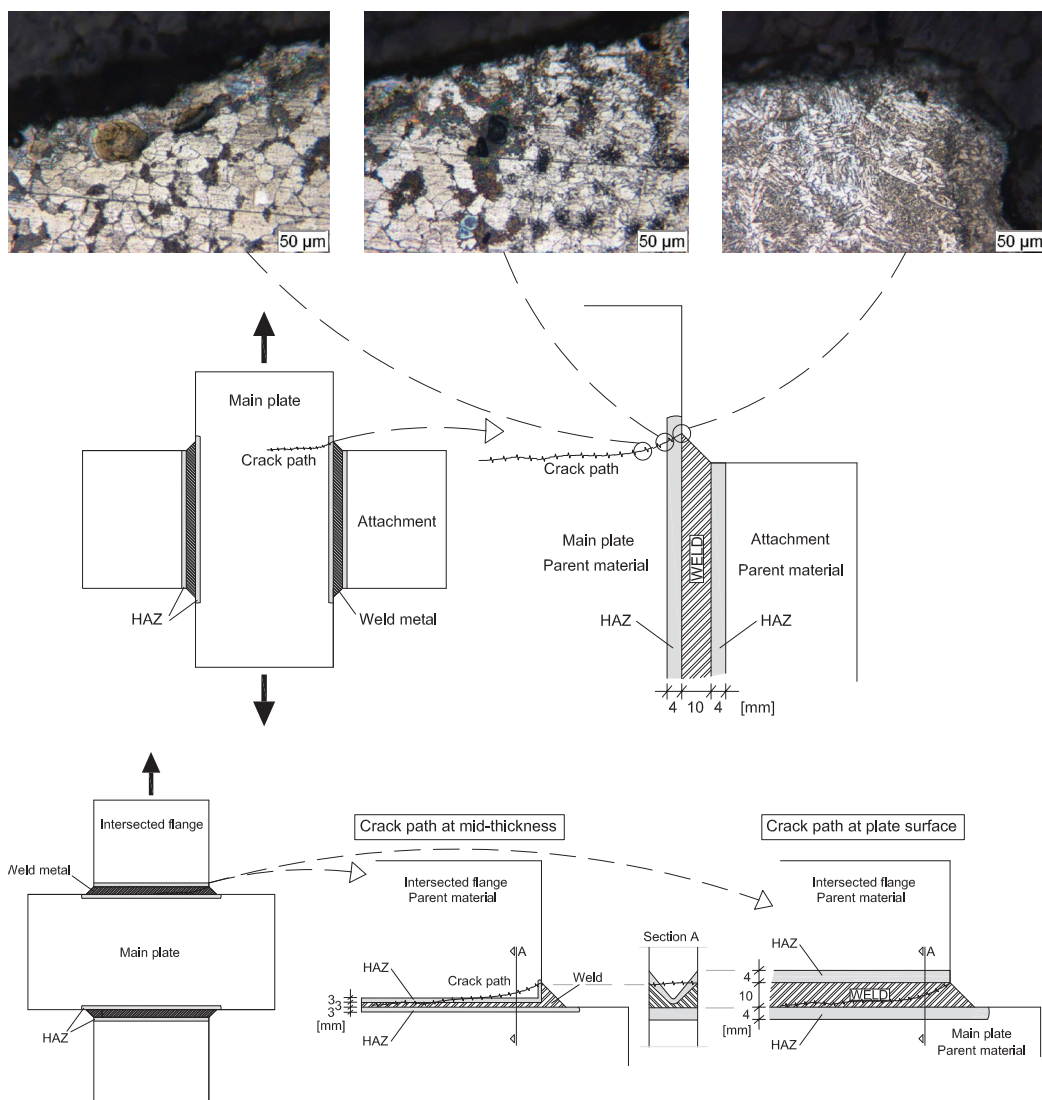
Crack paths for Flange tip lateral attachments and Intersected flanges
